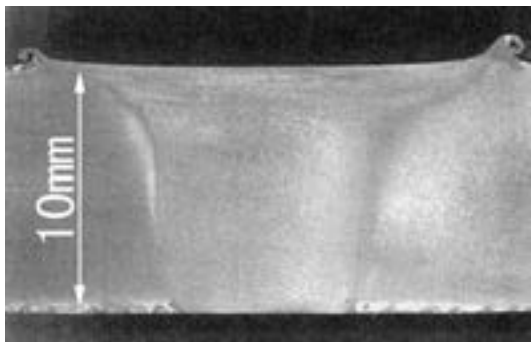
Macrostructure of transverse section of the FSW butt joint.
